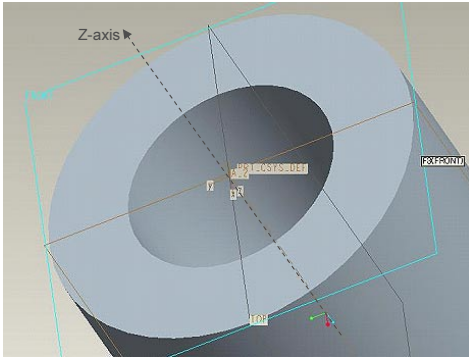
3D model of an LED lens mold designed by 3D CAD/CAM Pro/Engineer.
